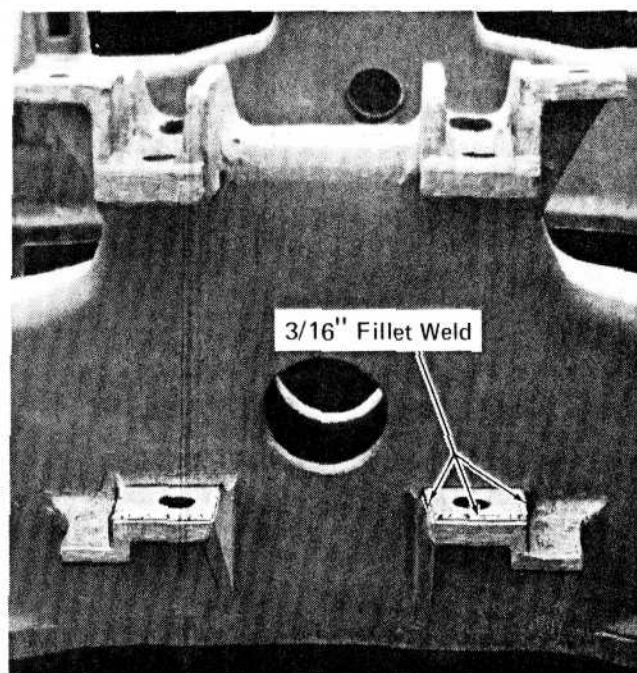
Traction Motor Nose Suspension Wear Plates
